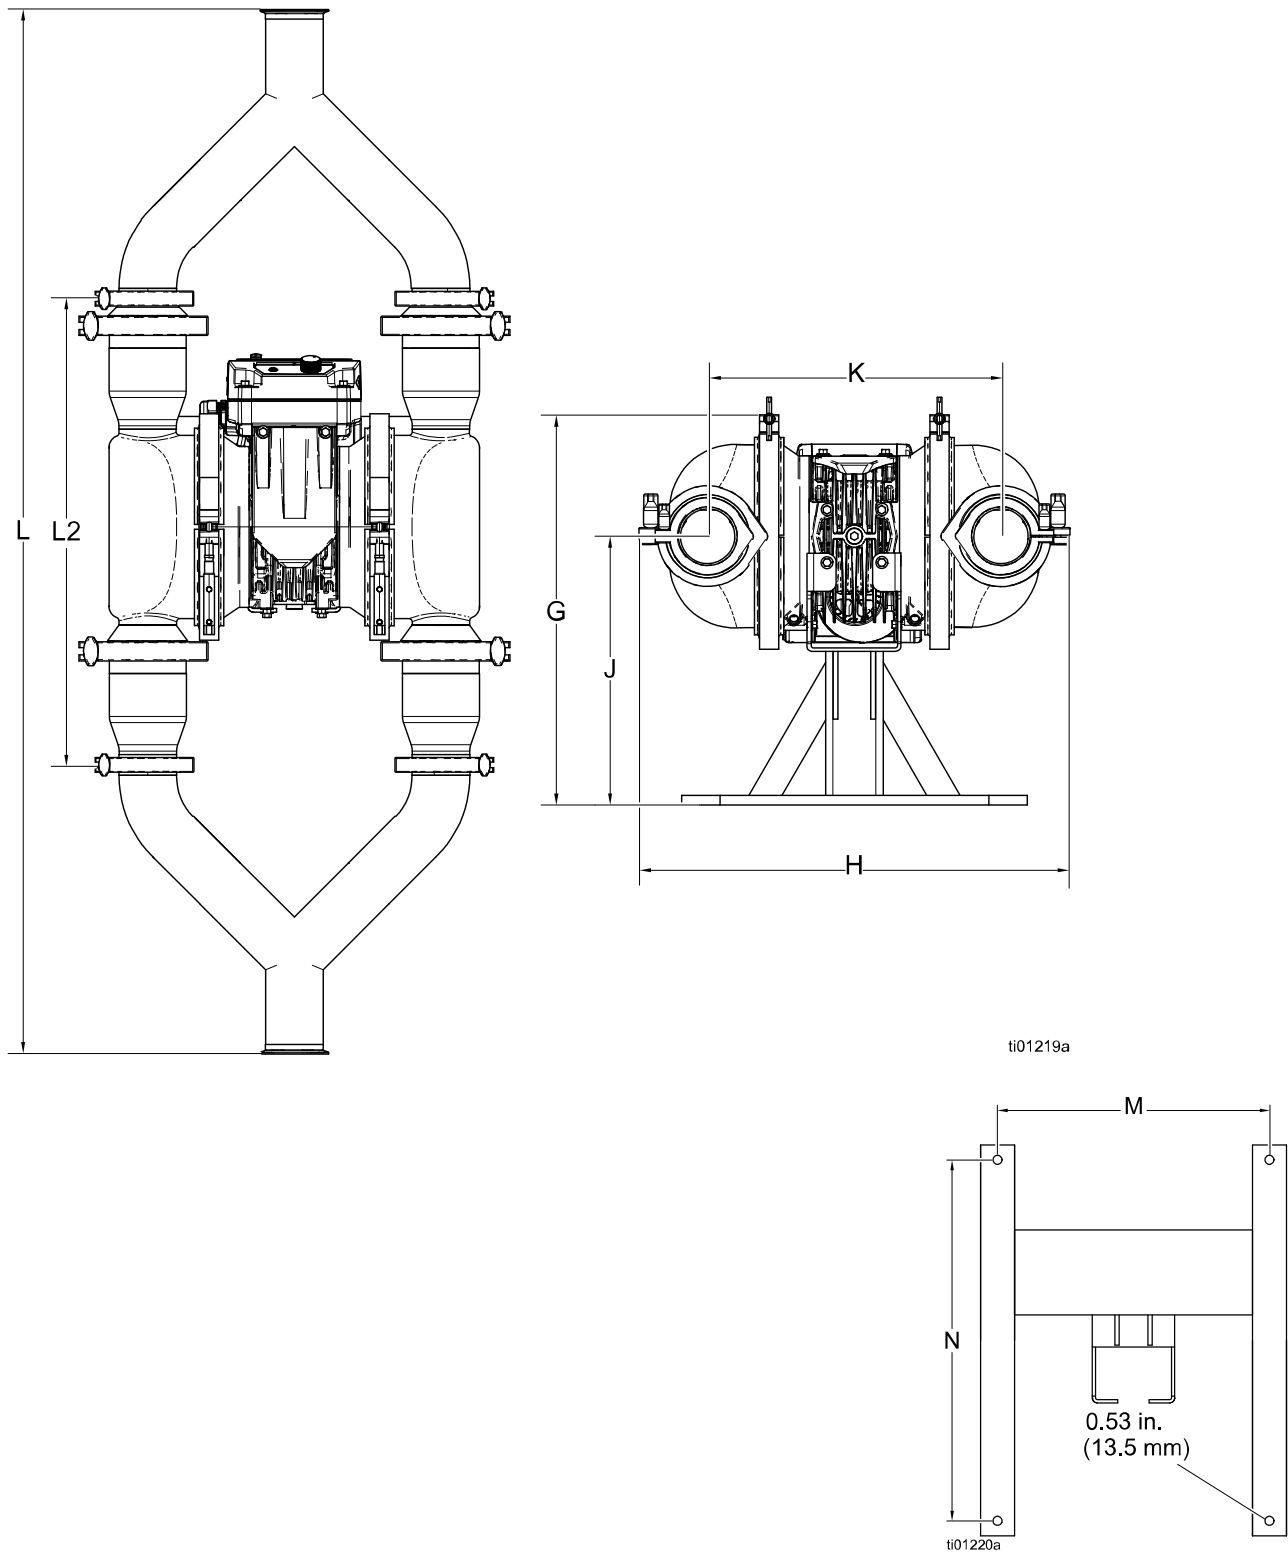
h120 (QHF) Horizontal Flapper Model Dimensions (SSE model shown)
